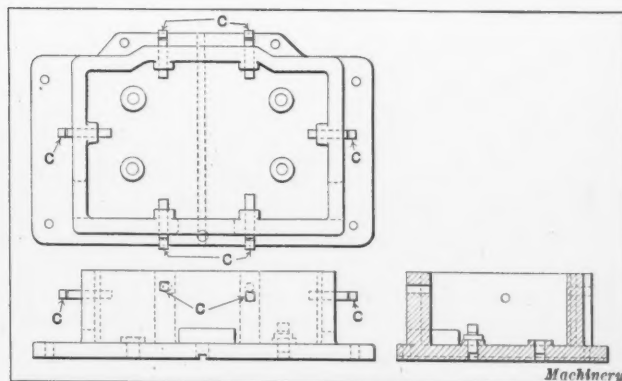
Design of Work-holding Fixture used on the Special Cylinder Head Boring Machine
